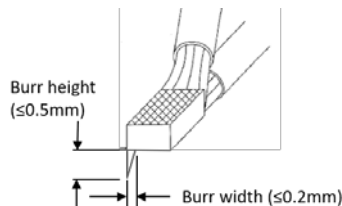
BURR MEASUREMENT IN CROSS-SECTION
